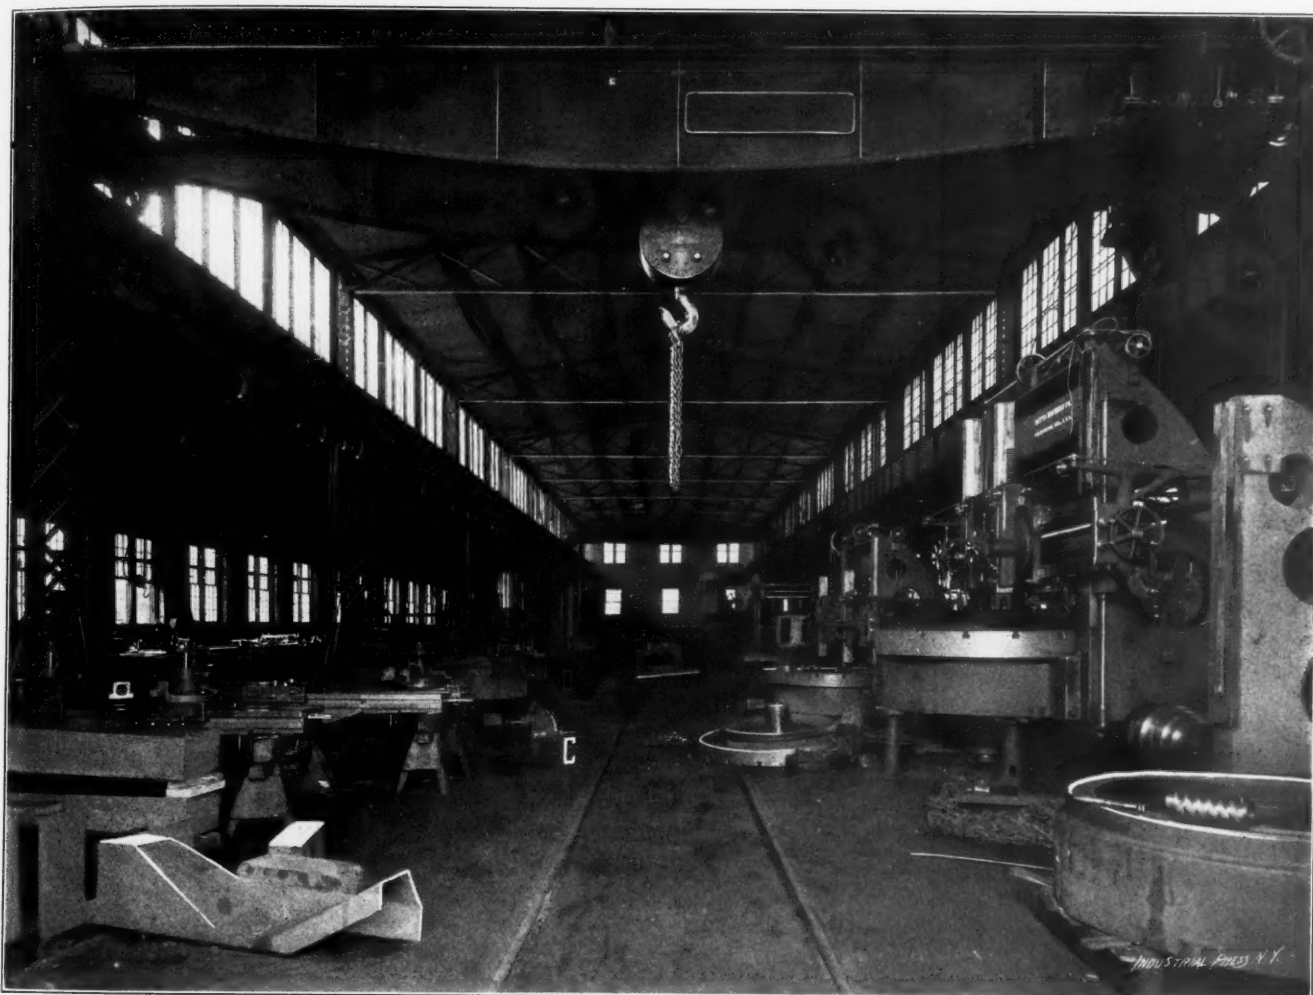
View of the Erecting and Heavy Machine Shop first built, looking nearly East toward South Street.
